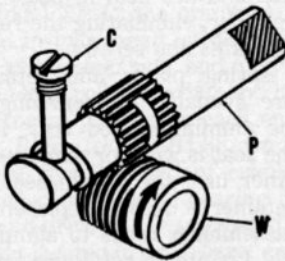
Automatic oil pump worm gear (W) driven by crankshaft turns plunger (P) at 1/20 engine speed. As plunger turns, cam on end of plunger engages cam screw (C) causing the plunger to go back and forth. Flat end of plunger acts as inlet and outlet valve.
